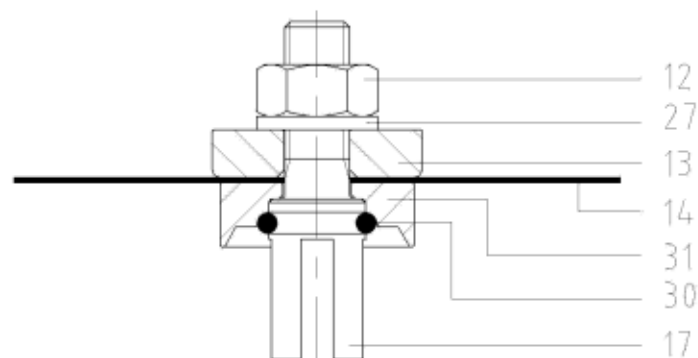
Qty	(Belonging to drawing 08.02)
